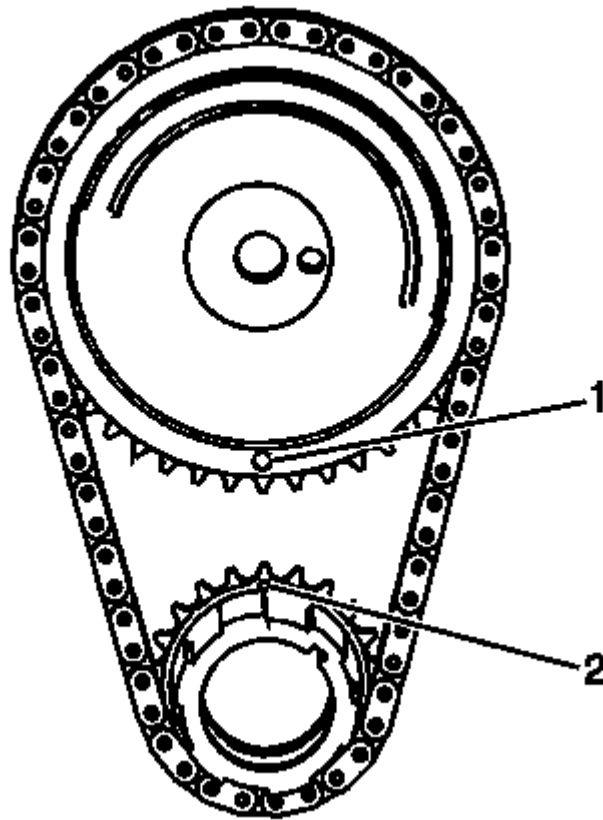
Identifying Camshaft & Crankshaft Sprocket Marks
